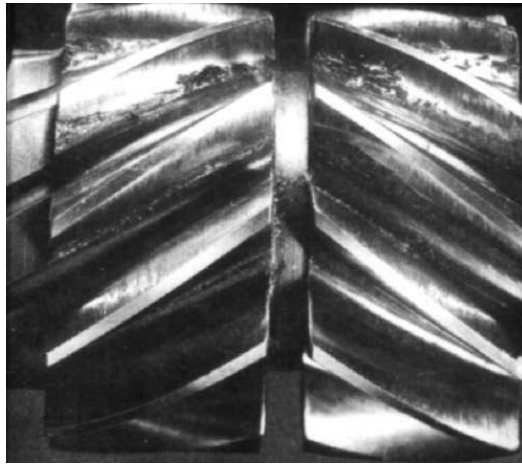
Flaking damage on gears (Dudley, 1962).
